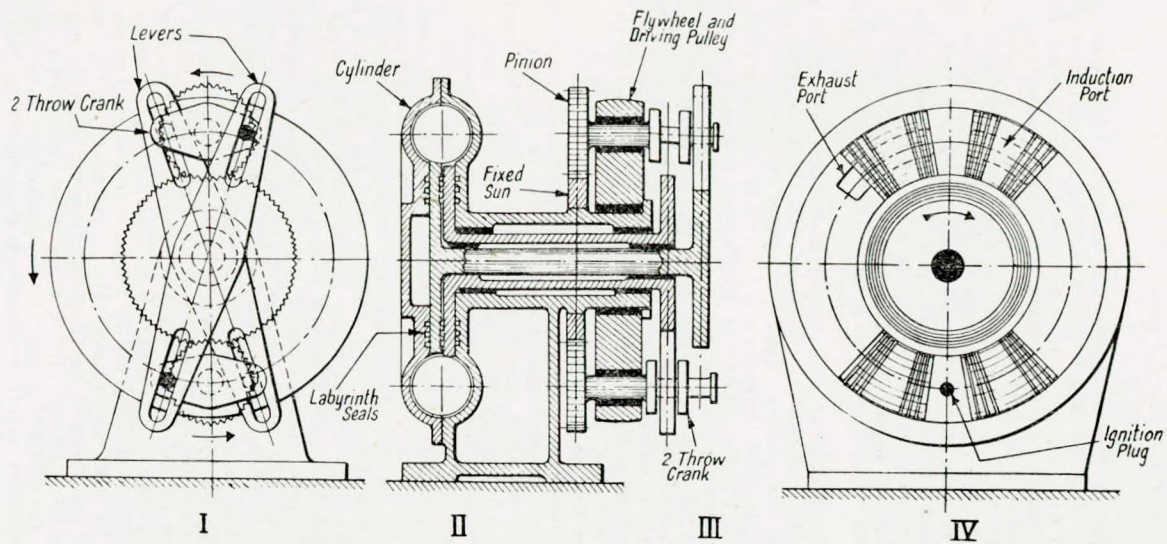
MUKHERJEE ROTARY PISTON ENGINE. 1940
